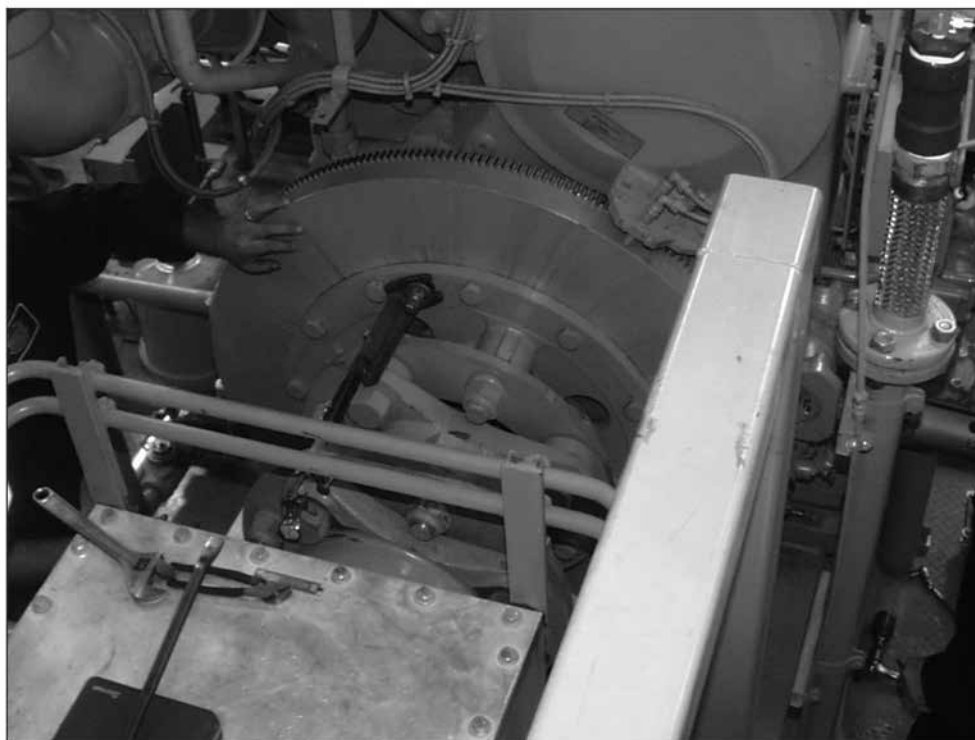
Measuring Coupling Alignment Using the Dial Indicator Method
